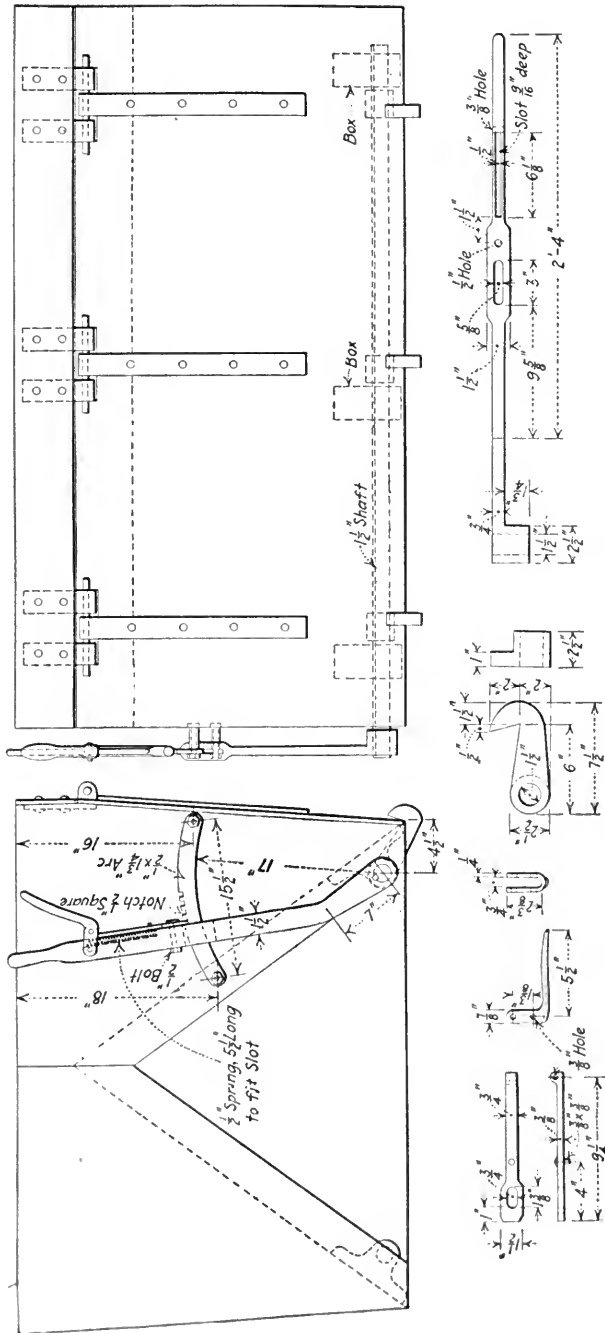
SPRING LEVER APPLIED TO SIDE DOOR OF CAR.
